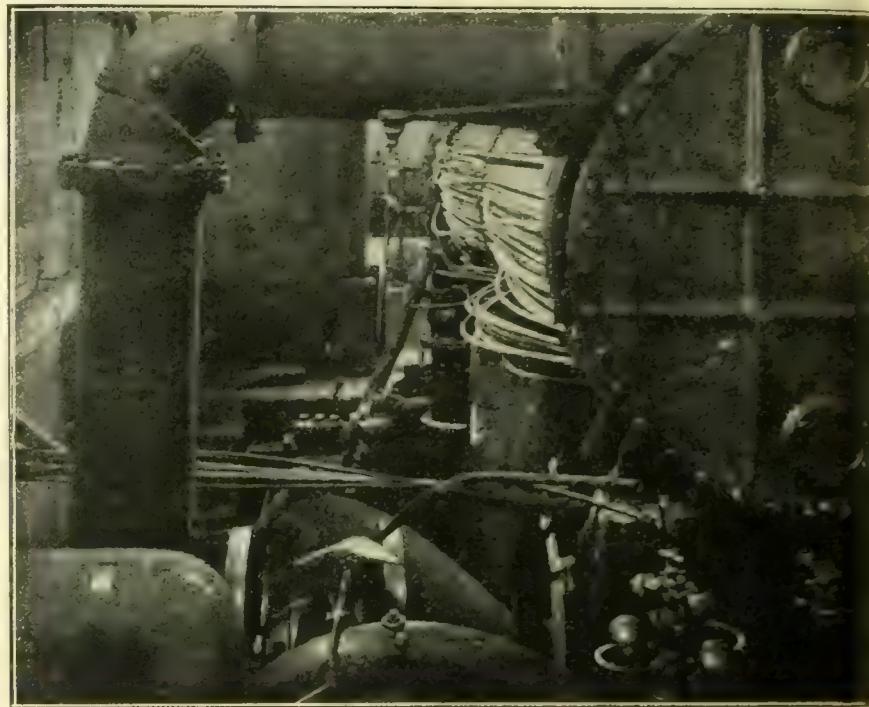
END VIEW OF CONDENSER, SHOWING FRACTURE IN CIRCULATING PIPE.
